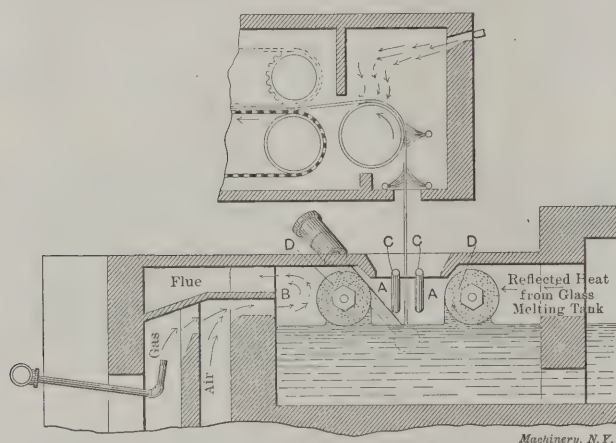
Cross-section of Perfected Continuous Sheet Machine.
